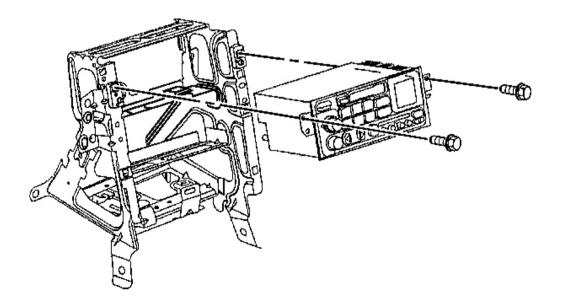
Radio Control & Center Bracket Courtesy of GENERAL MOTORS CORP.
